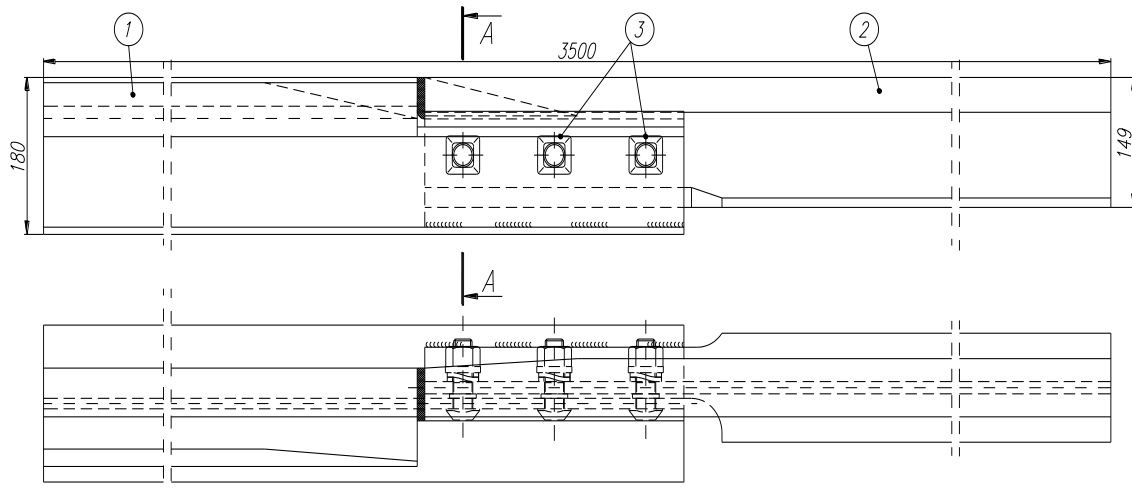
60R2 / 49E1 connecting rail (ver.II): 1- 60R2 rail, 2- 49E1 rail, 3- bolted joint
